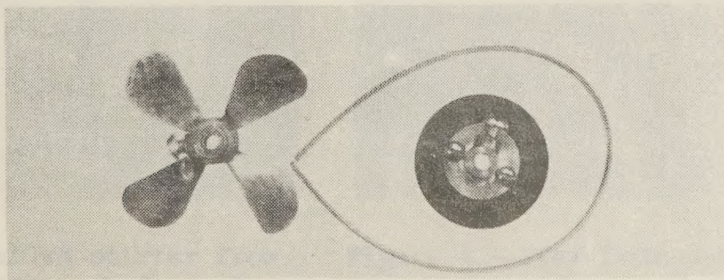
Stirrer blade and large pulley from below, showing details of attachment to the hubs.
